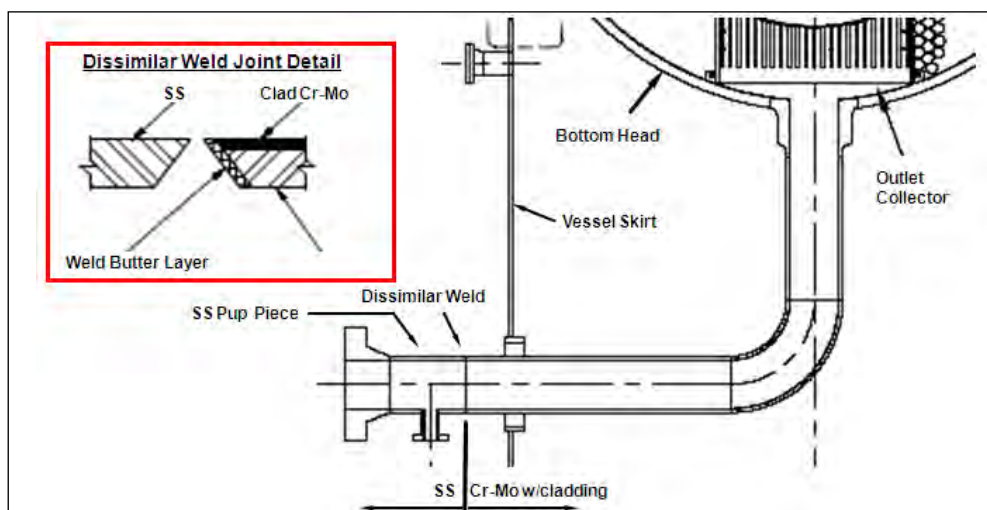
Schematic of typical weld detail used to join a solid stainless steel pipe to a clad or weld overlaid pipe. The sequence is as follows: (1) butter the weld bevel on the ferritic steel side, (2) perform PWHT of the ferritic side prior to making dissimilar weld, (3) complete the dissimilar weld using alloy filler metal, and (4) do not PWHT the completed dissimilar weld.
